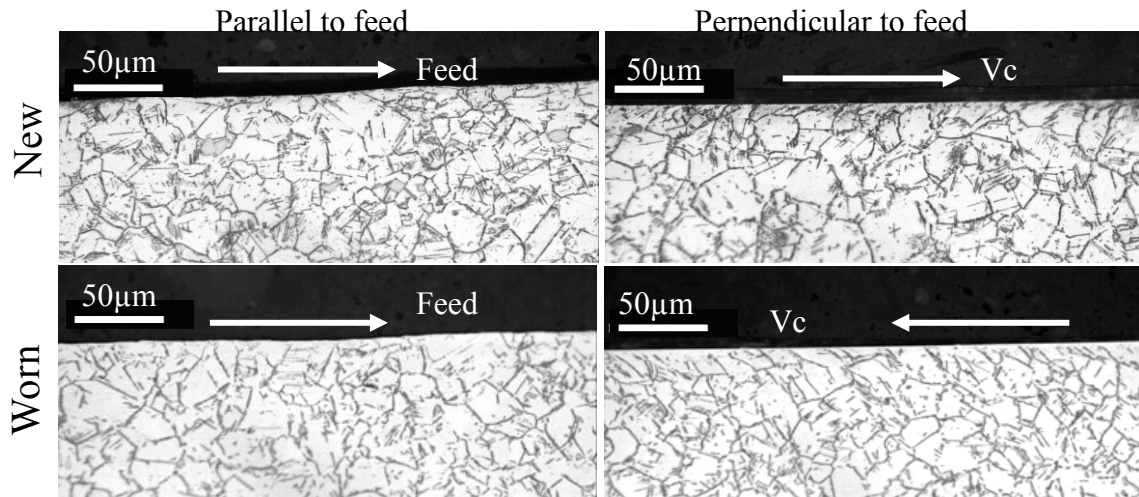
Cross-sectional optical micrographs of machined workpiece sub-surface produced with uncoated tools at cutting speed of 300m/min
